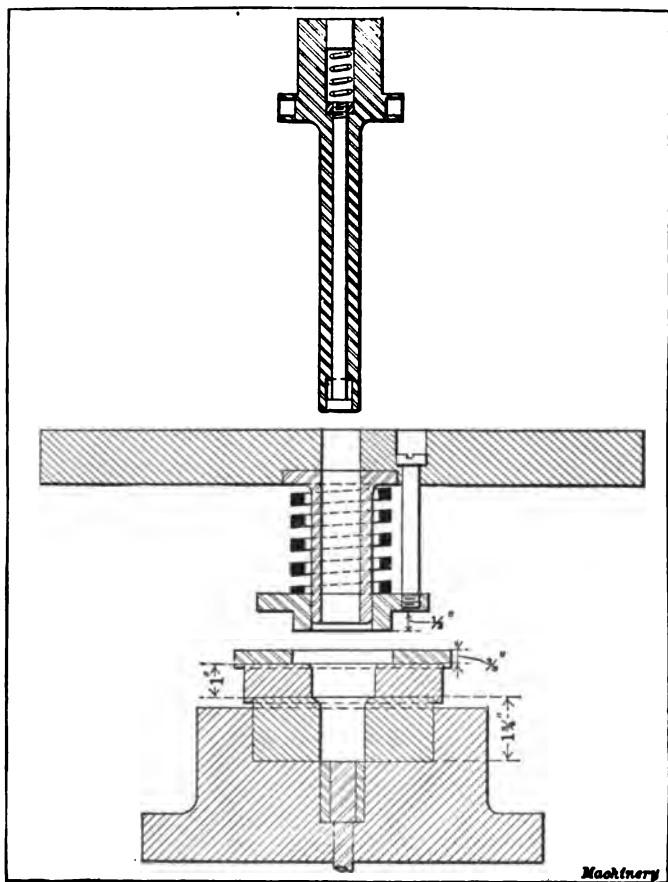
Die for Blanking, Drawing, Redrawing and Punching the Hole in a Ferrule in One Operation
